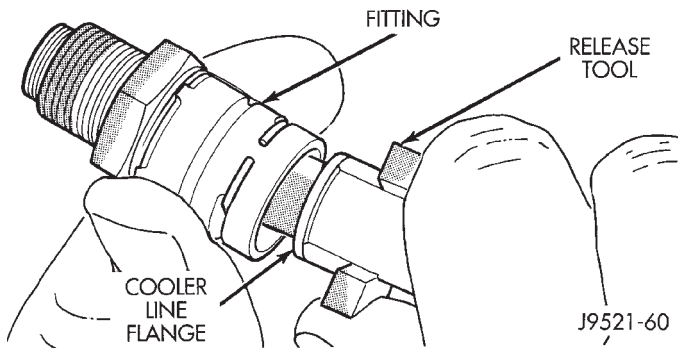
Disconnecting Cooler Line With Release Tool (Type 2 fitting)
